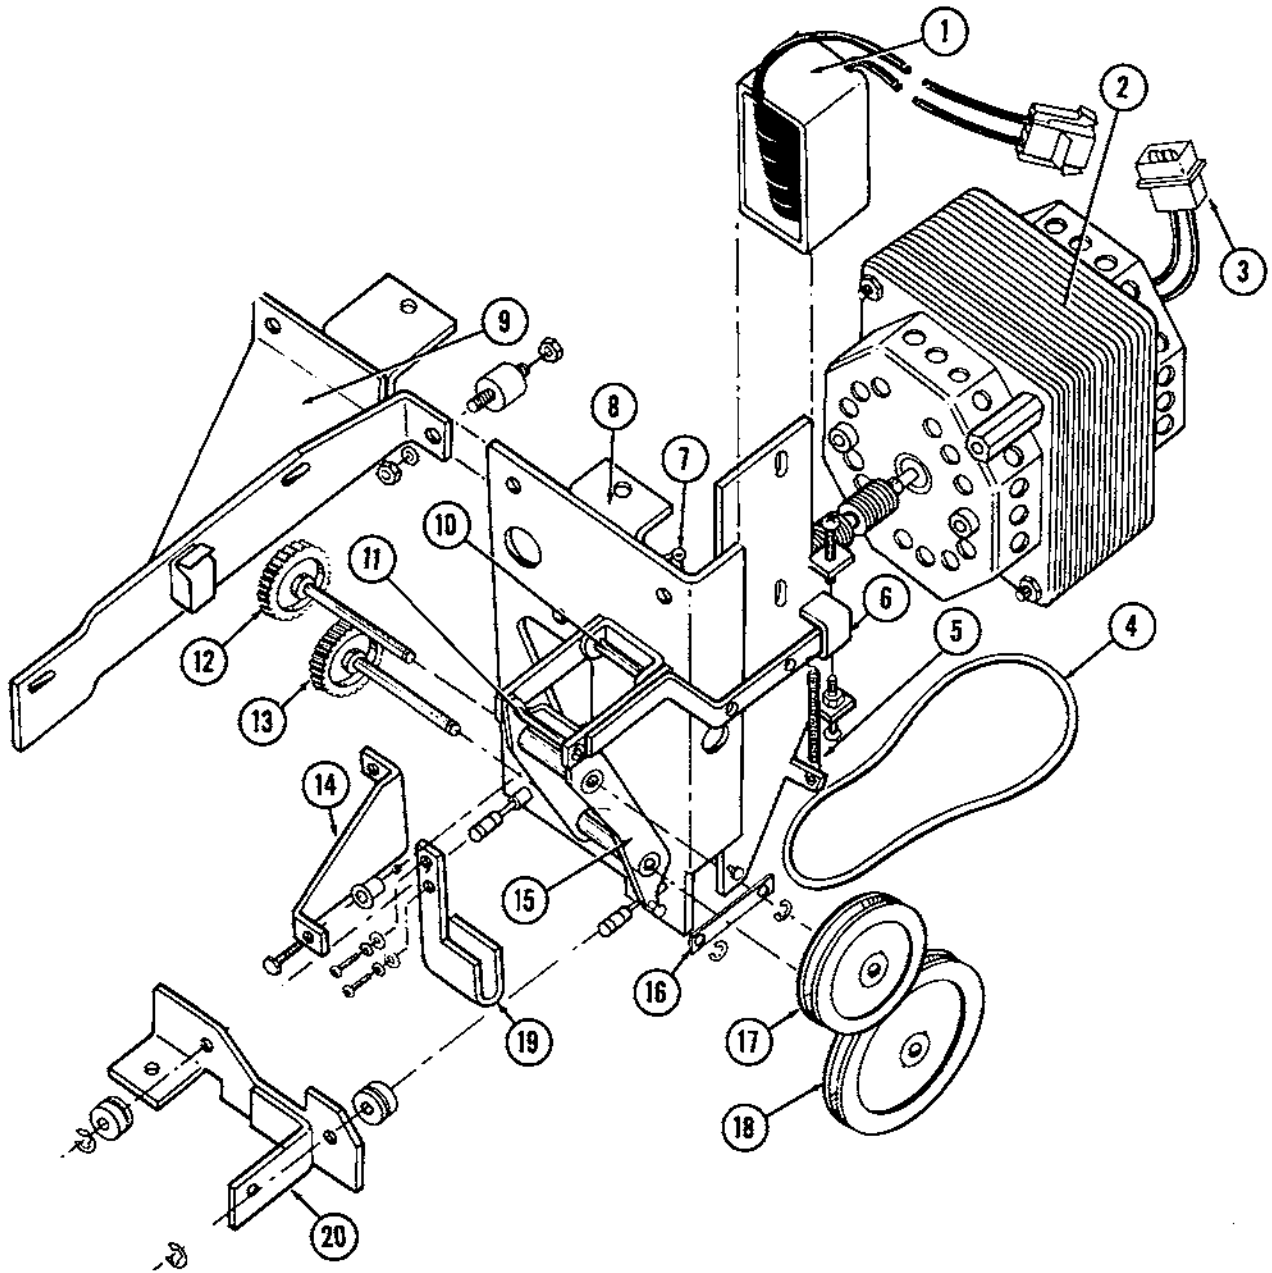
TURNTABLE MOTOR AND MOUNTING BRACKET ASSEMBLY
